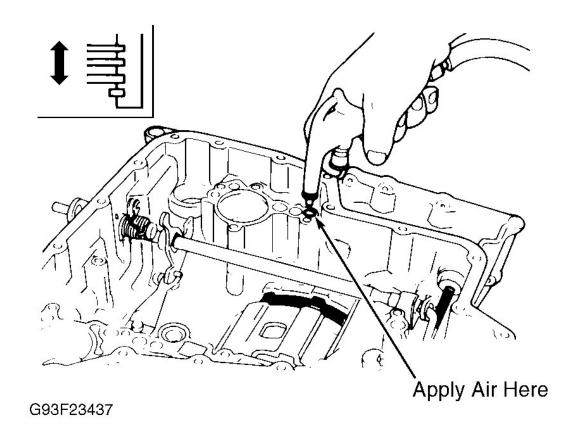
Checking Low & Reverse Operation Courtesy of NISSAN MOTOR CO., U.S.A.
